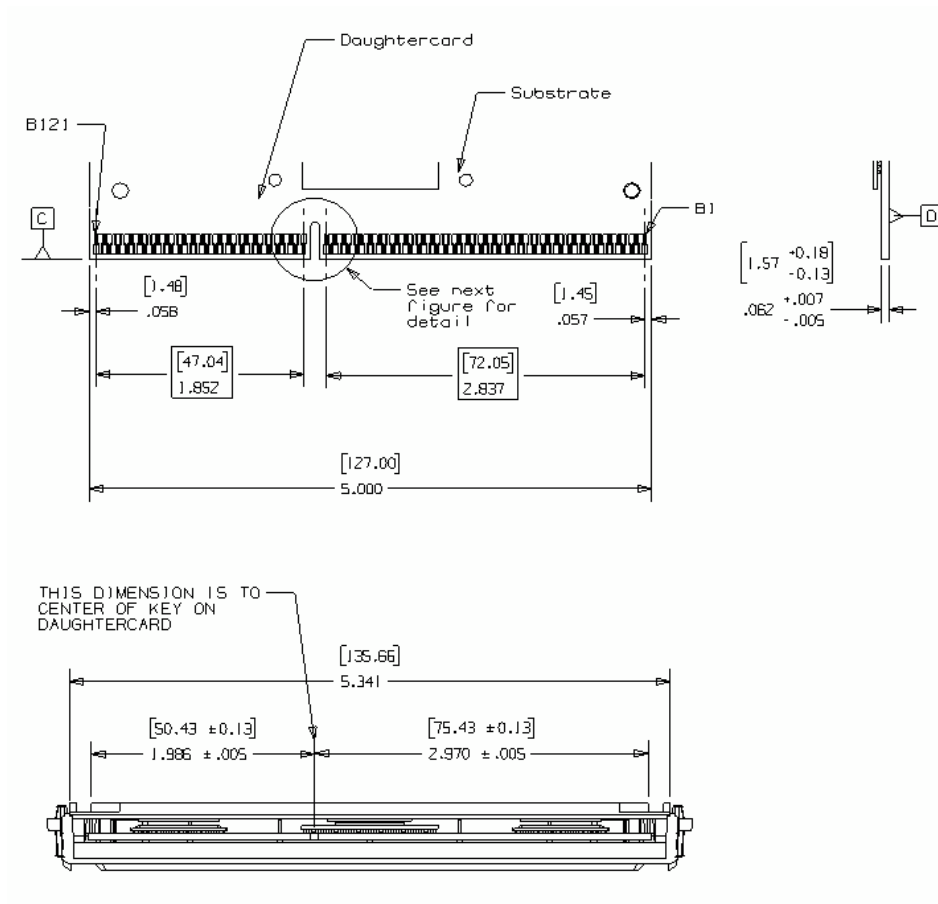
Card Edge Dimensions—Thermal Plate Side View
